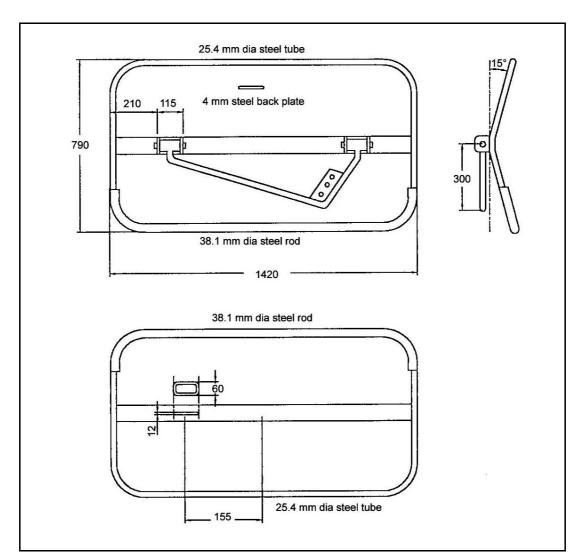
Design details of V-type otter boards (1420x790 mm; 80 kg each)
